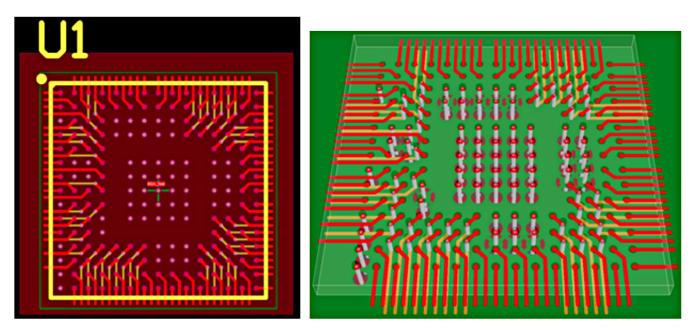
Signal lead with fanout and escape routing, and a voltage supply connection as with via in pad.
